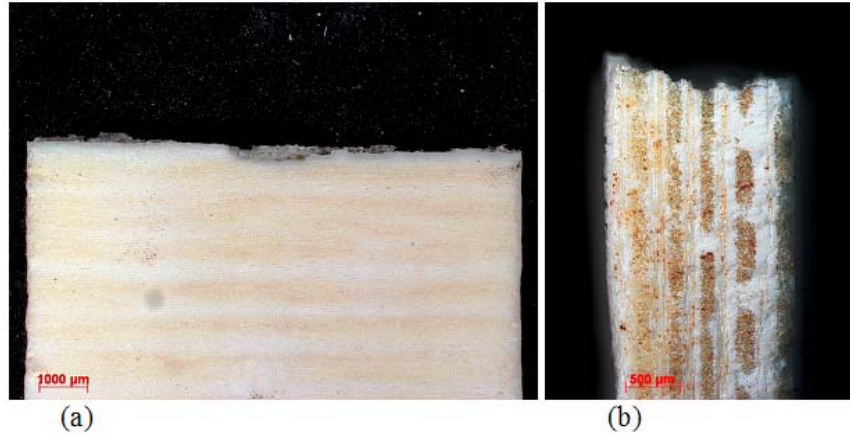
Fracture surface of C2 composite specimen tested in tension to failure at 1100 °C in laboratory air: (a) front view and (b) side view.
